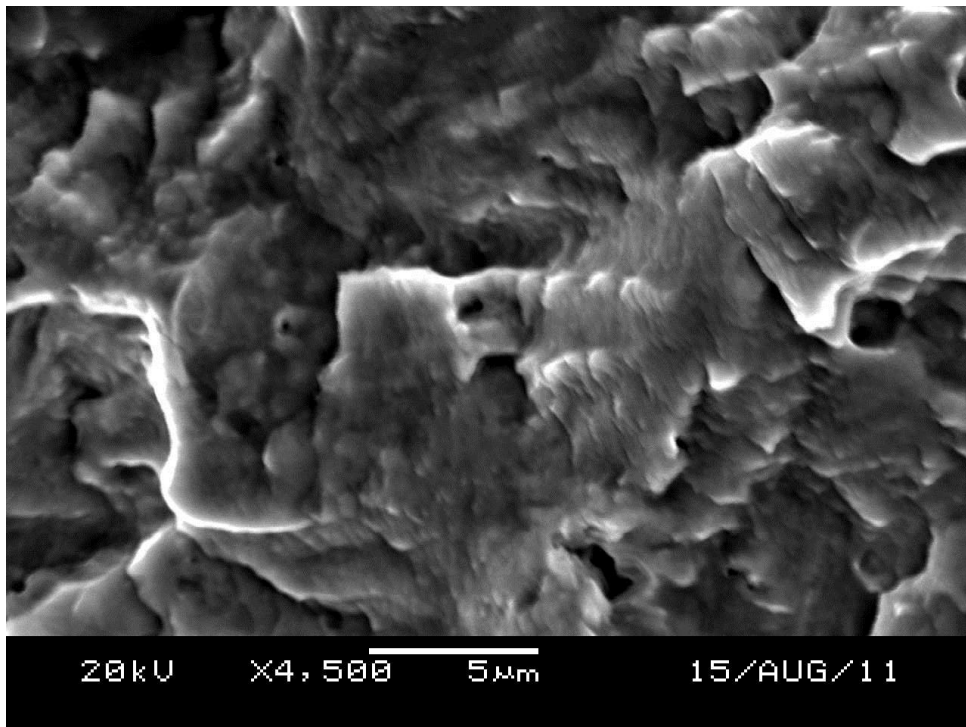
Striations in R7.5A40° (As-Received) reciprocating movement fracture surface.
